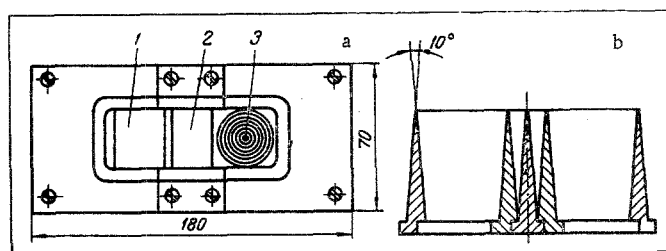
Layout of standard specimens and test specimen in the heated yoke.
